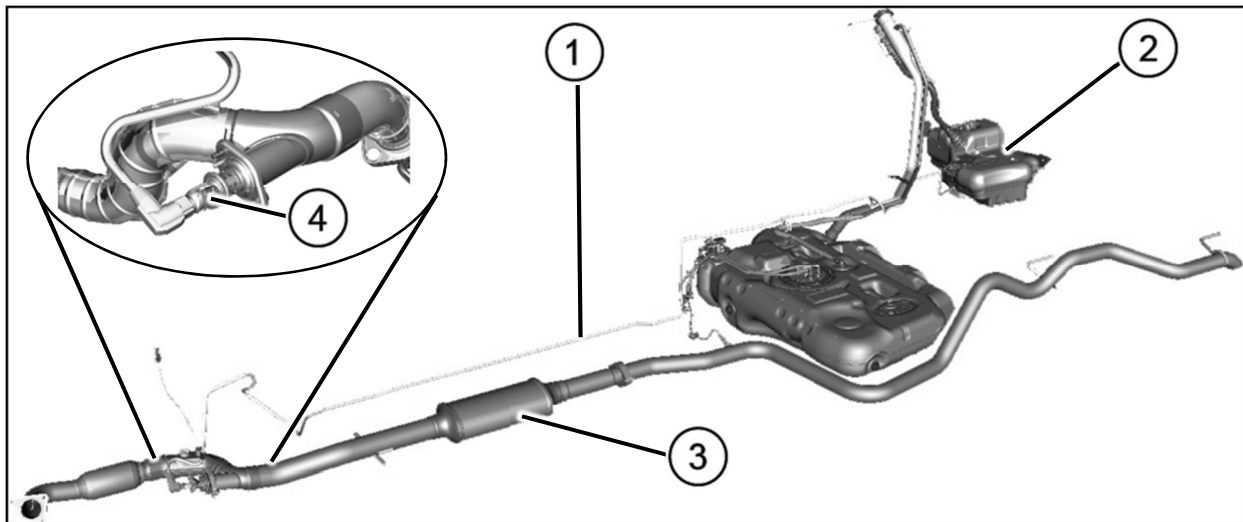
, 1.6L LH7 Exhaust Aftertreatment Components
